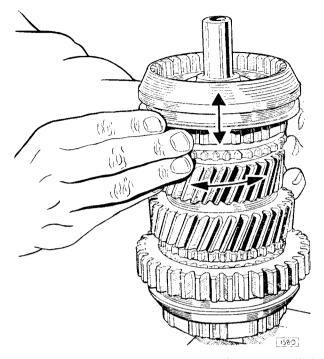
Checking the 4th (top) gear interlock plunger. With the top gear engaged there should be approximately $\frac{3}{6}$ " (4.76 mm.) axial movement without any drag. With top gear still engaged and with slight downward pressure exerted on synchro assembly the 3rd speed gear should be free to rotate.
